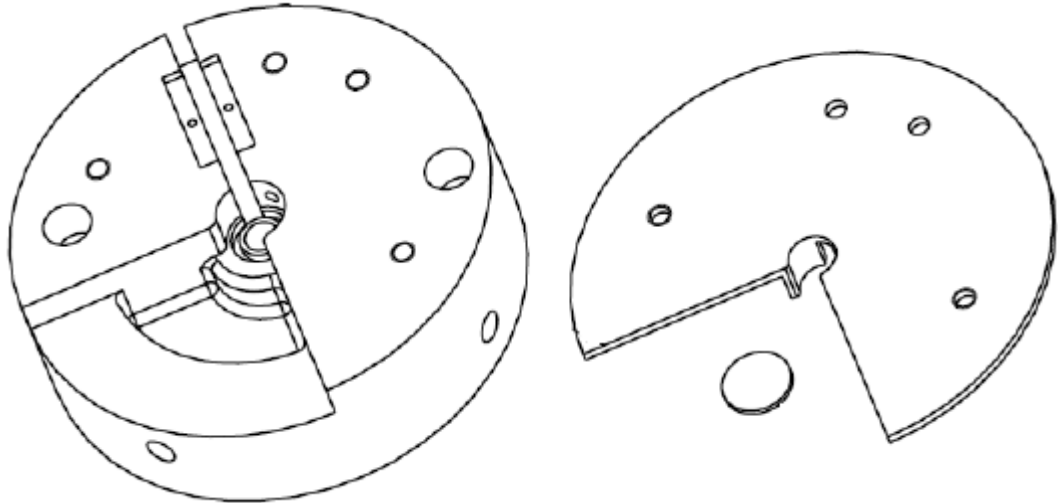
CAD View of the machining cell with the base, the workpiece and the cap
